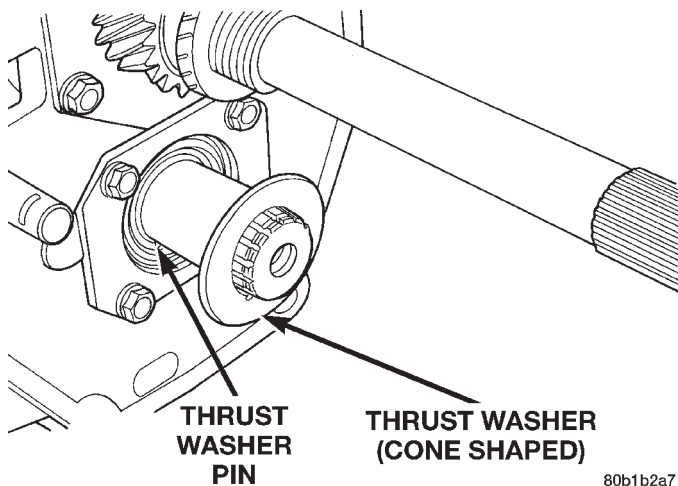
Countershaft Rear Bearing Thrust Washer Removal
